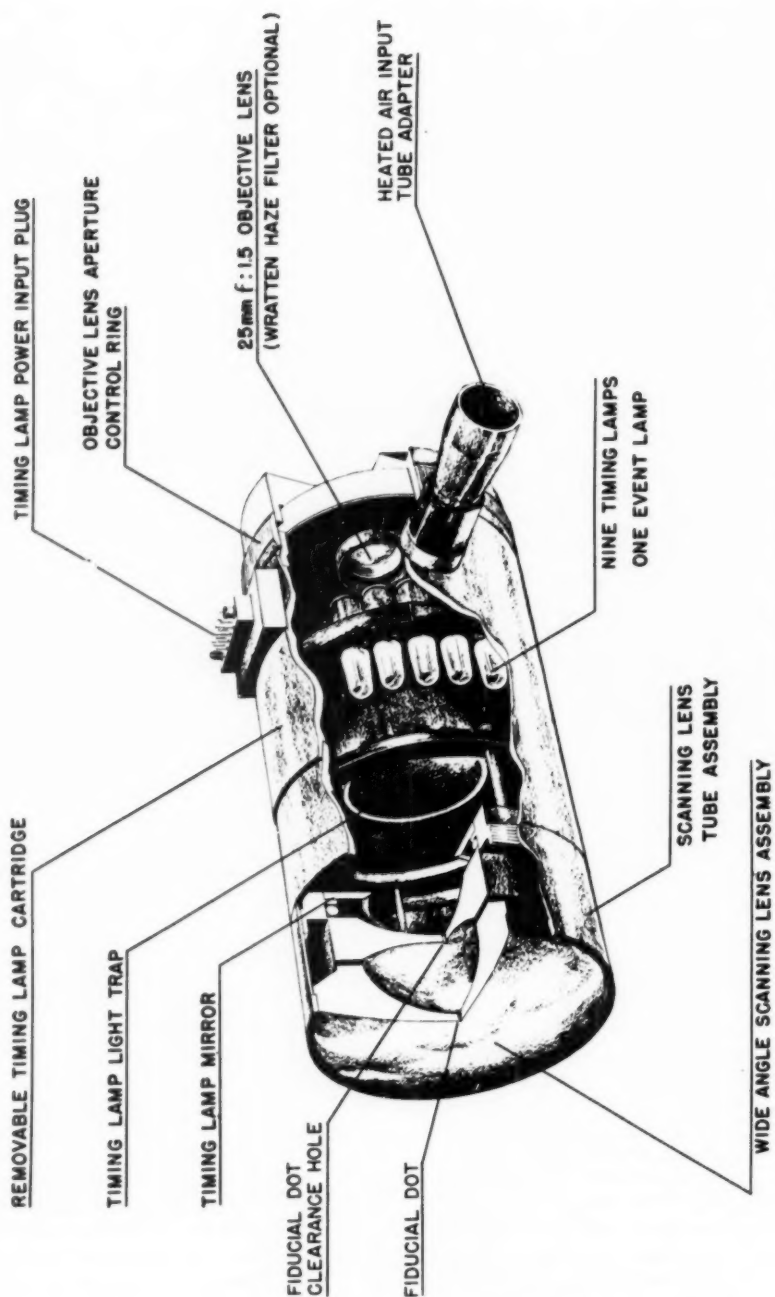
Scoring camera wide-angle optical assembly; field of view in excess of 142° full-cone angle.
